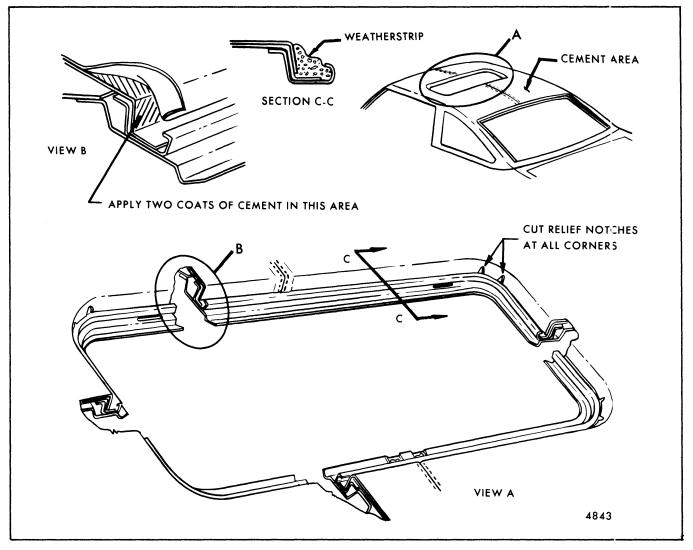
Fabric Roof Cover Installation - Vista Vent Option
